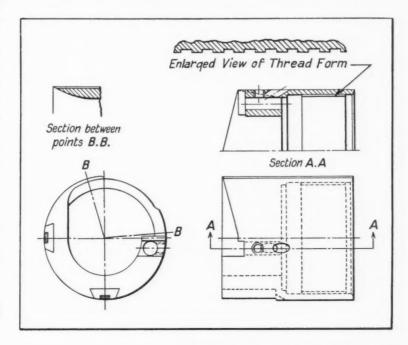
General form of a typical high-speed trepan-boring head. Dimensions of the head will vary with operating conditions.
